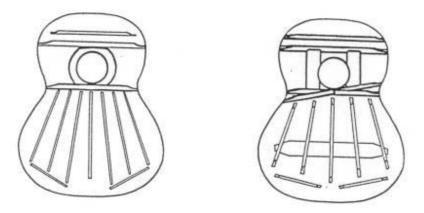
Examples of different constructions of the guitar top plate: common simple construction (left) and typical handmade Spanish construction (right).
